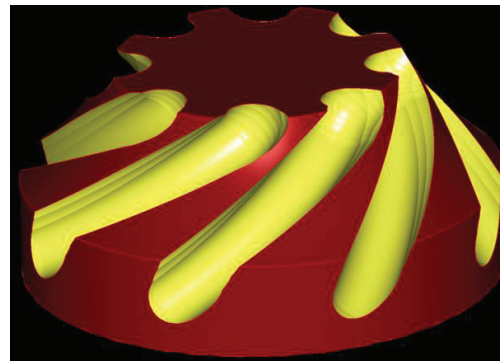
The simulated machined surface of impeller blade for 5-axis rough machining.
